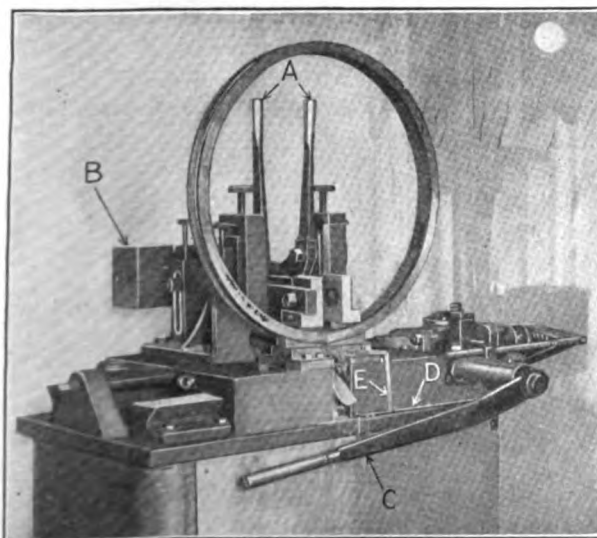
ELECTRIC BUTT WELDING CHANNELS
